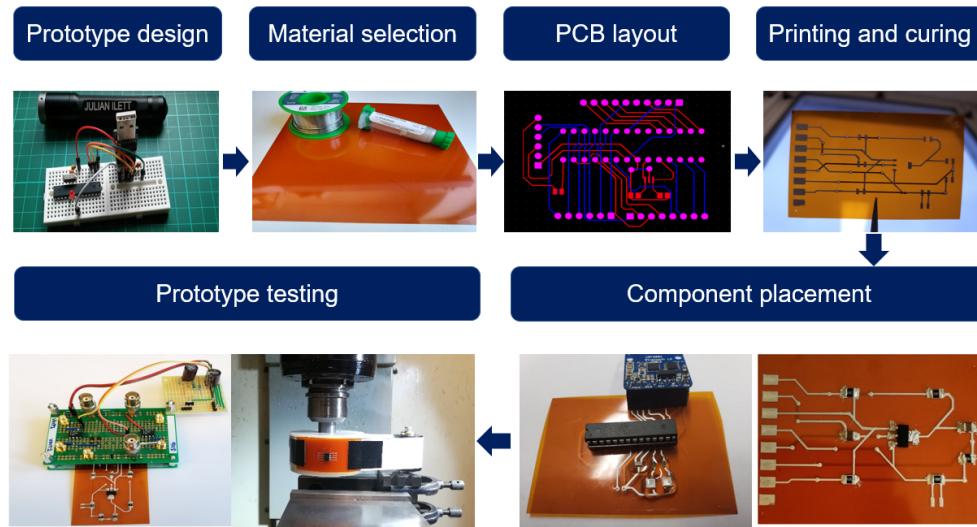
Workflow of fabricating and testing FHE prototypes using additive manufacturing technology.
